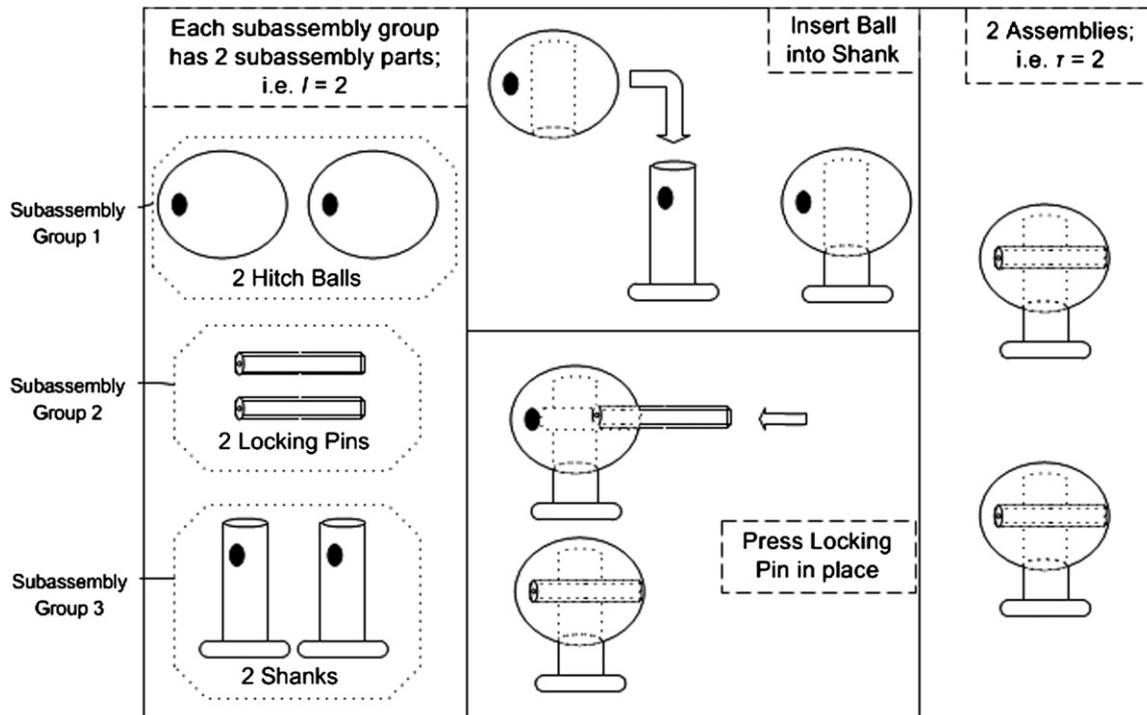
Example of an assembly (product) of 3 subassembly groups ($M=3$) and 2 subassembly parts ($l=2$) to make 2 final assemblies ($\tau=2$).
